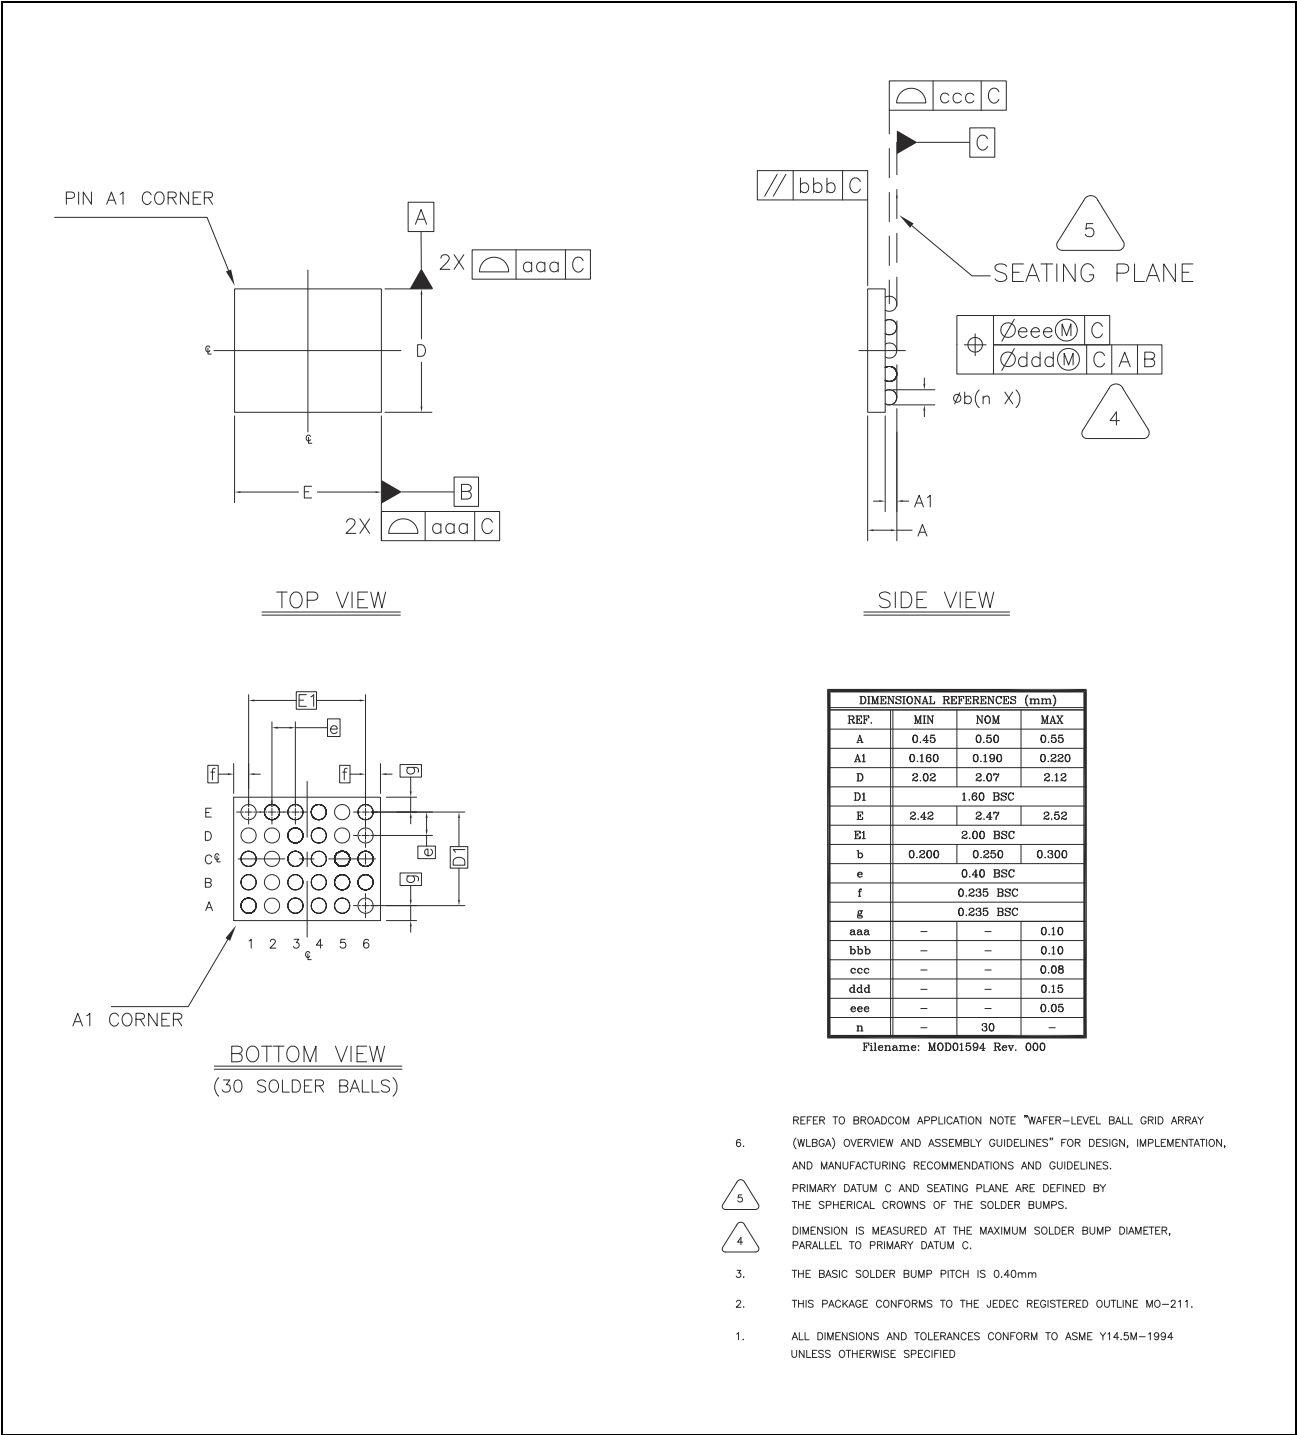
Outline Dimensions of the 30-Pin WLBGA Package
